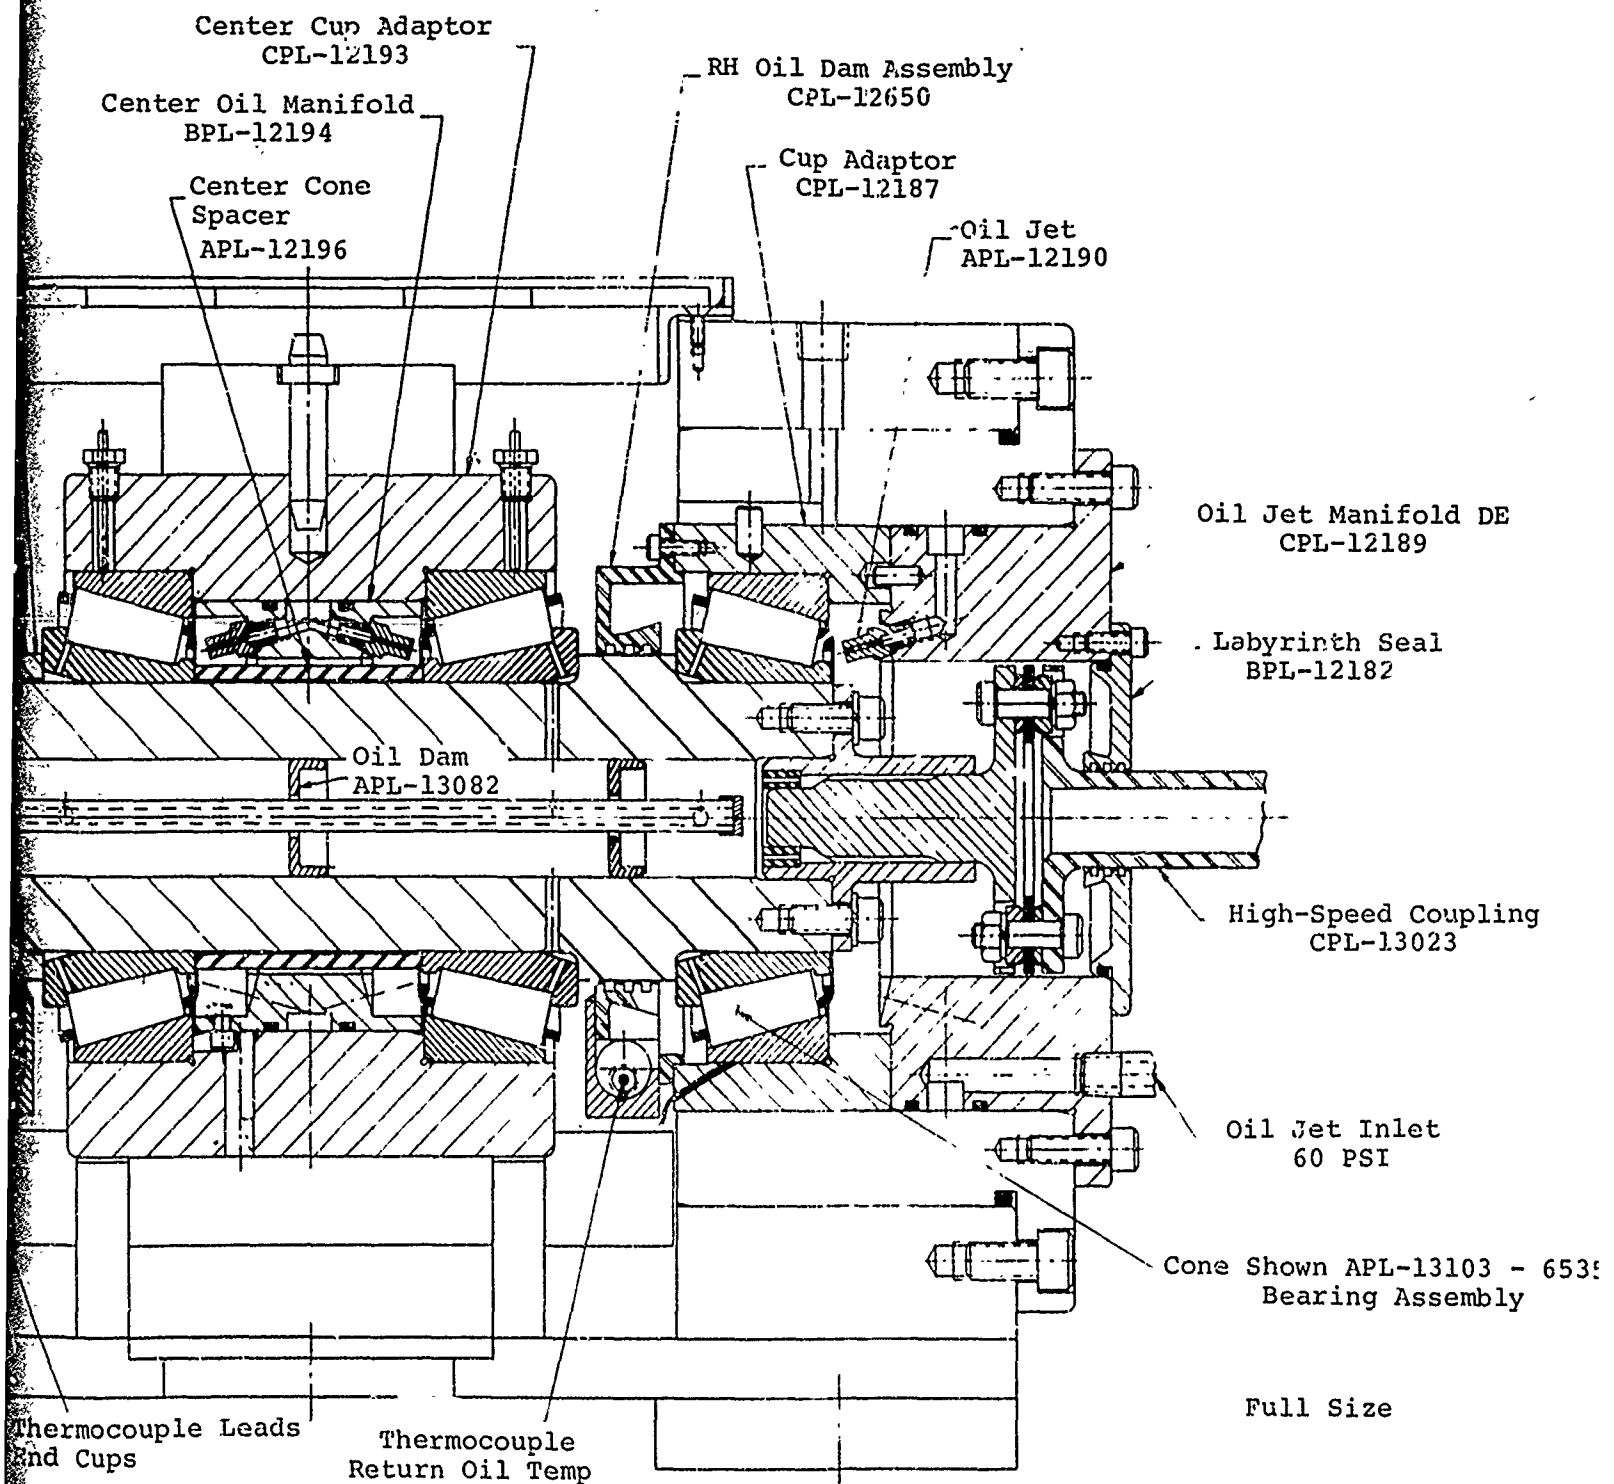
Full-Size Subassembly Bearing High-Speed Test Using Hollow Shaft.
